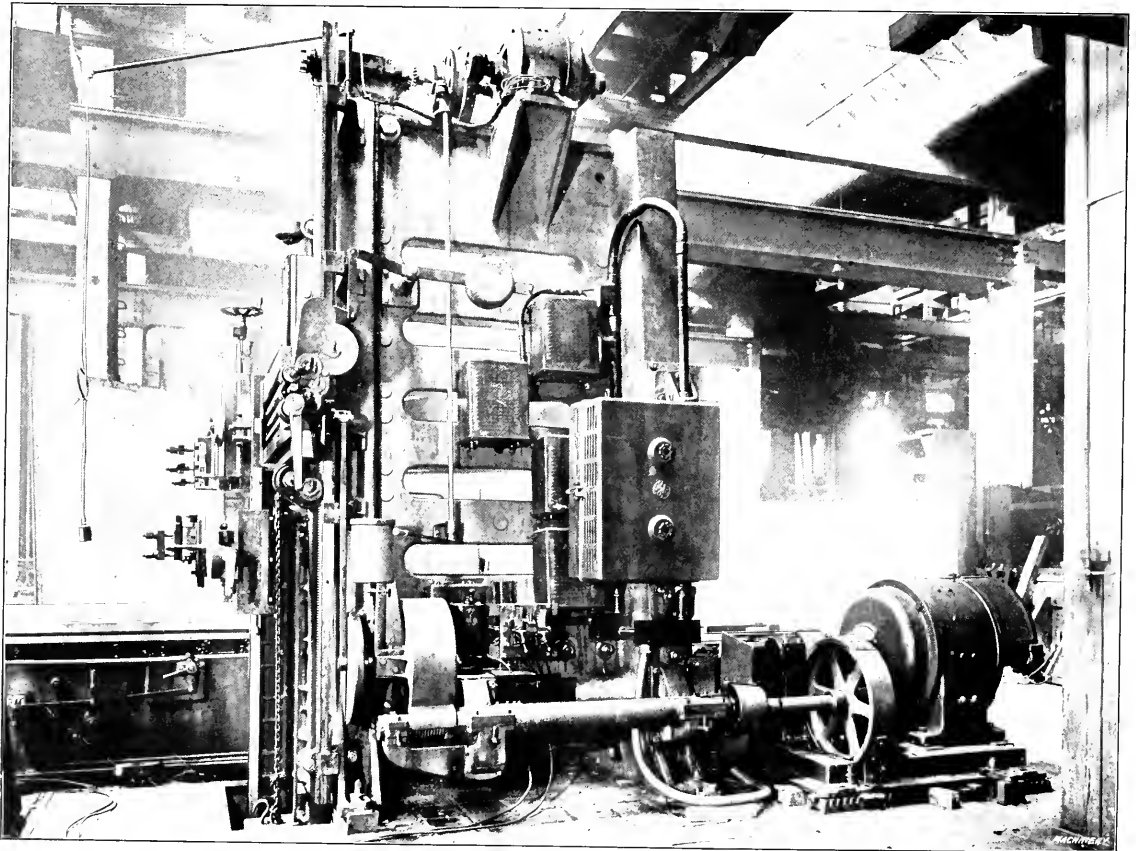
Side View of Convertible Planer shown in Figs. 1 and 2 illustrating Arrangement of Drive
